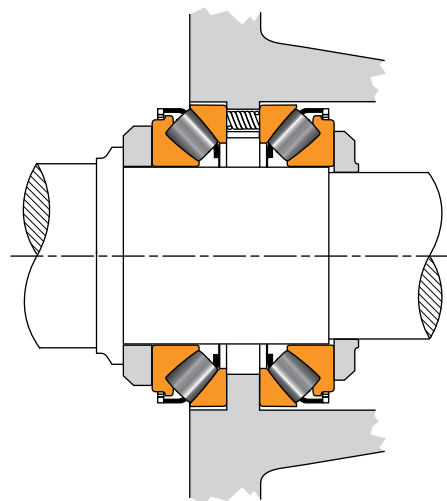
Back-to-back mounting arrangement of a TSR-EJ bearing set.
